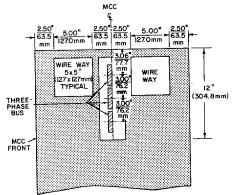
Side view showing top area dimensions for 20-in. (508 mm) deep section with 2-in. (50.8 mm) bus bars
